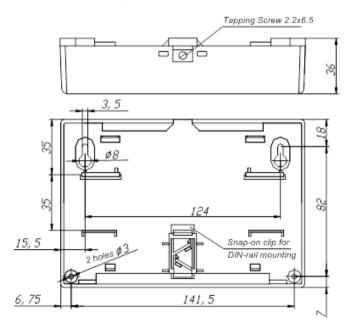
Overall and Mounting Dimensions of the S2000-USB
